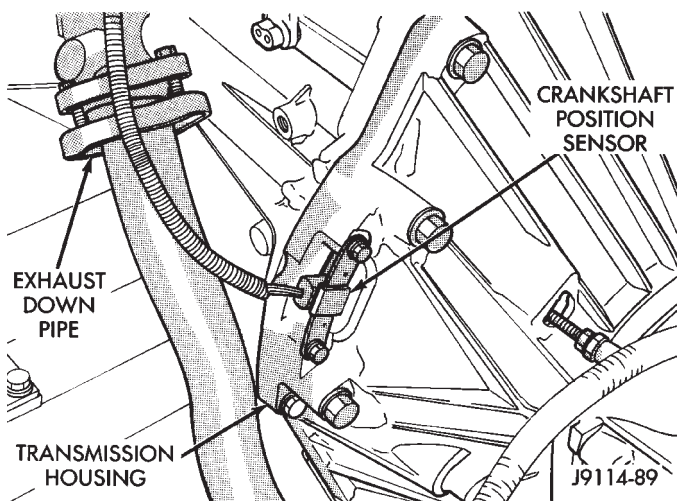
Crankshaft Position Sensor—2.5L 4-Cylinder Engine—Typical
